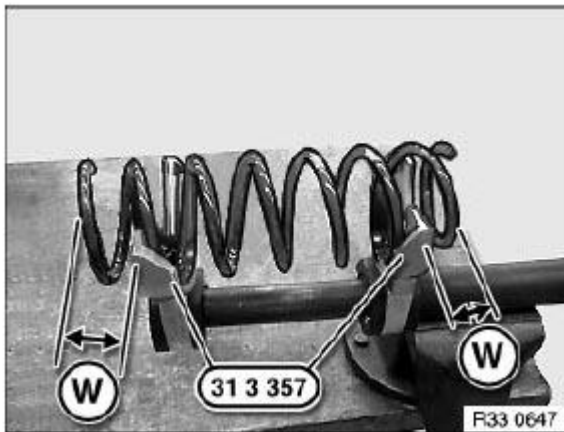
Identifying Coil Spring And Special Tools 31 3 357
